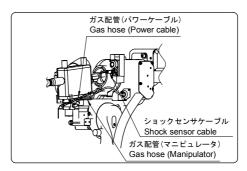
Connection of the coaxial power cable (B6 type manipulator)
